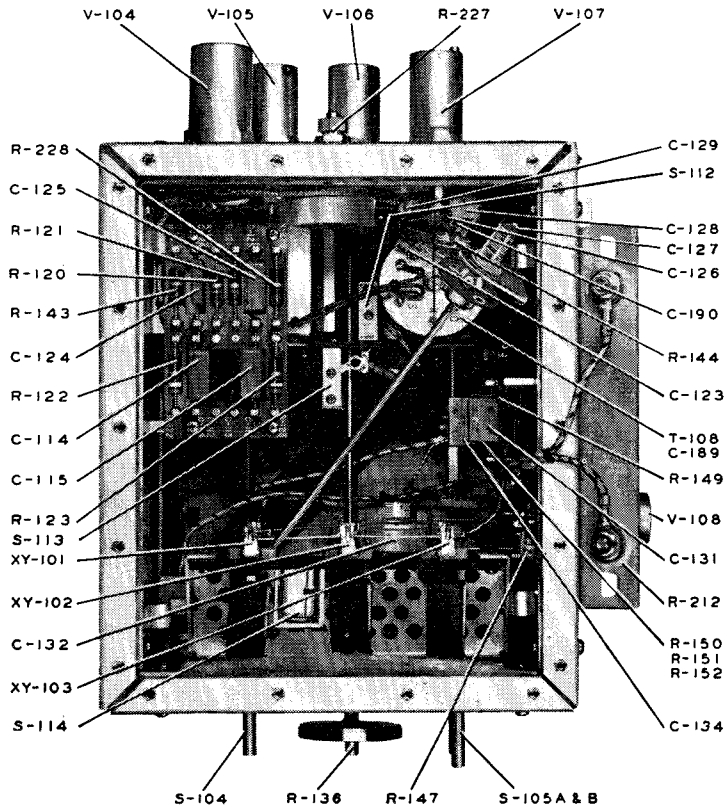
Keyer KY-30/GRT Oven Parts Arrangement, Top View
